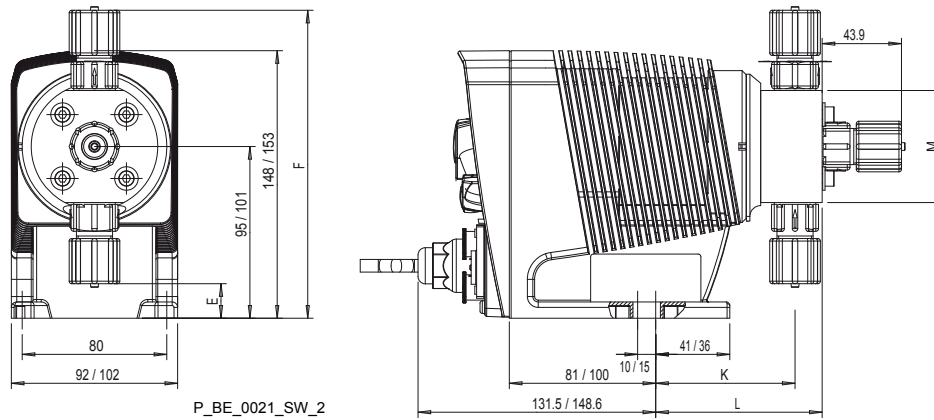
Dimensional drawing Beta b BT4b/BT5b, material versions PP and NP with self-bleeding dosing head SEK - dimensions in mm
